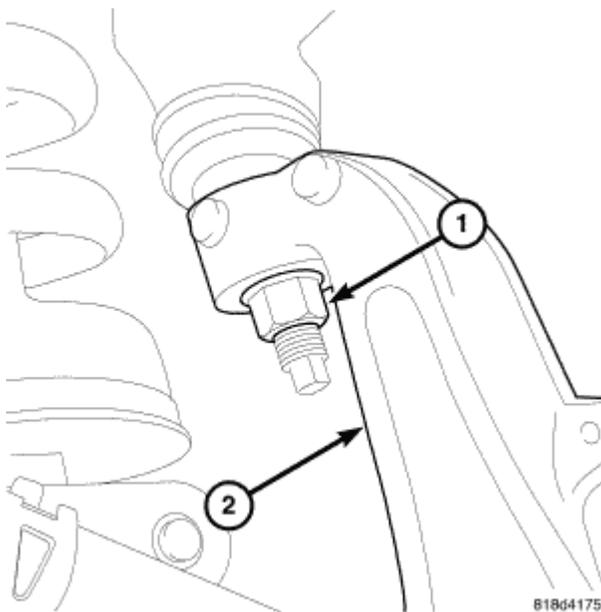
Identifying Upper Ball Joint Nuts & Steering Knuckles
